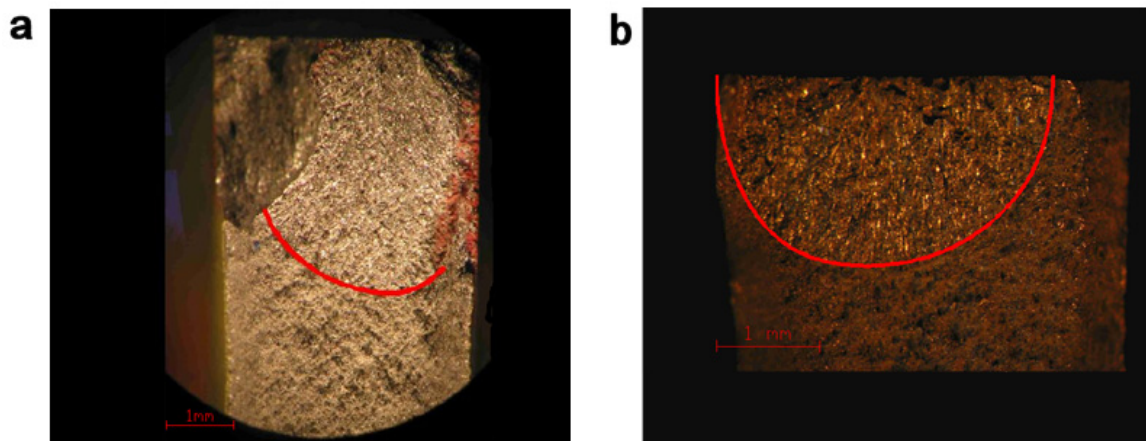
(a) front of the long through crack; (b) front of the short crack.
